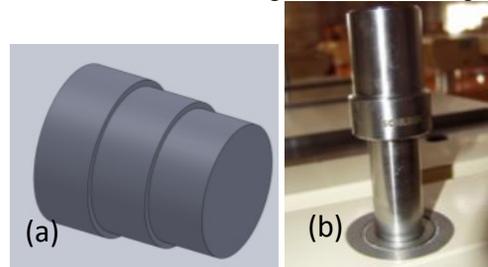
(a) The diagram of stepped circular PSD module (b) The picture of expansible diameter jig.
